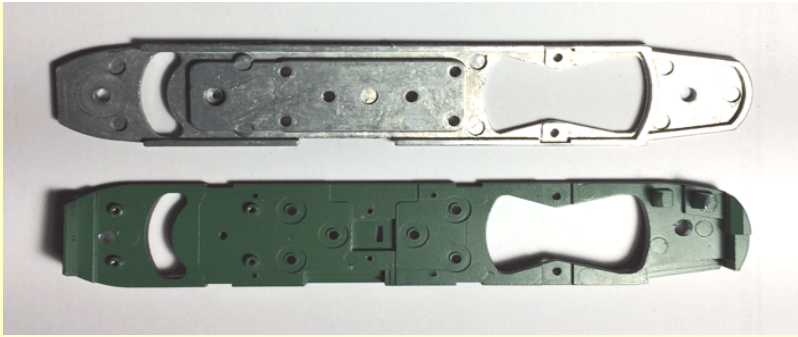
Bowser 1361 floor after mounting holes drilled in the ends to match the Bowser 1283 floor.
